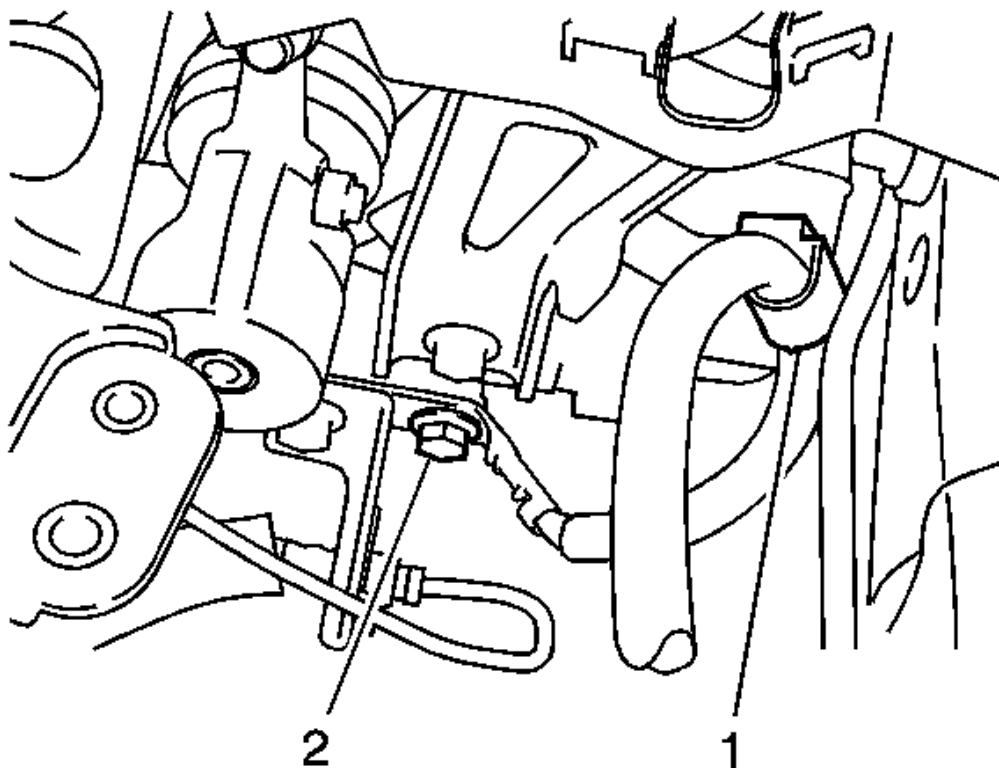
View Of Bolt & Clamp (Manual Transaxle)
